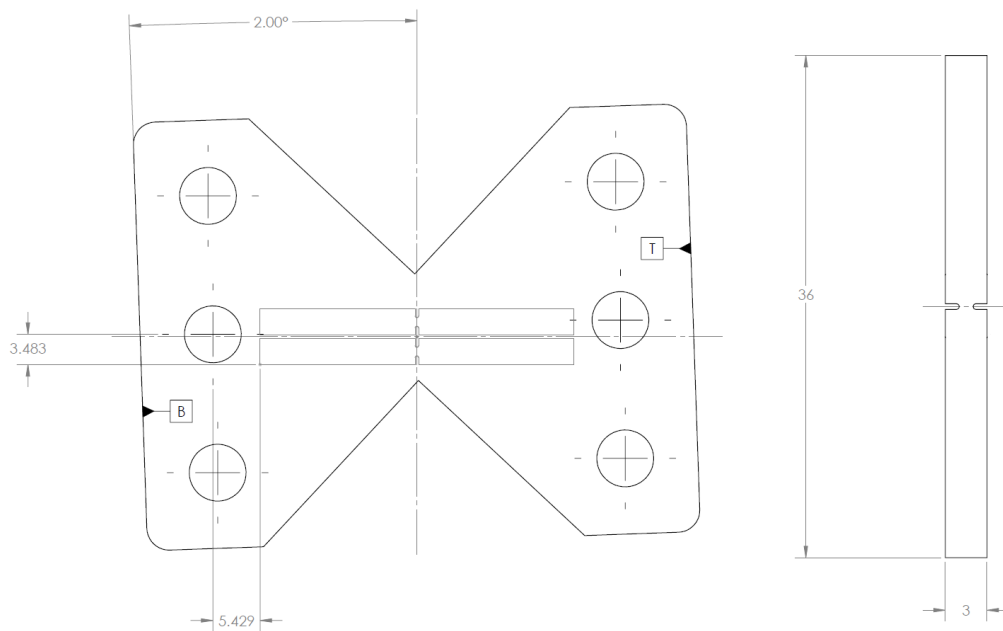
Notch Tension Specimens From Arcan Specimen (mm)
